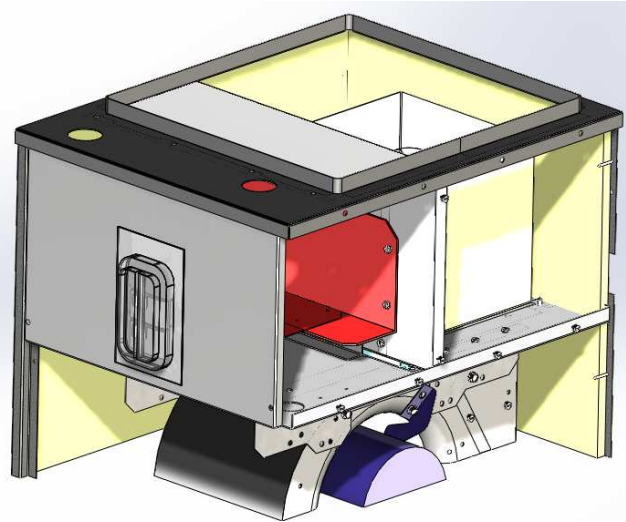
Heater Accessory Installed (right side panel not shown)
